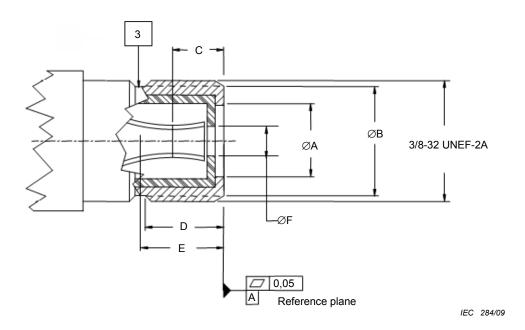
Connector "F" type female socket (indoor) (for dimensions, see Table 1)
